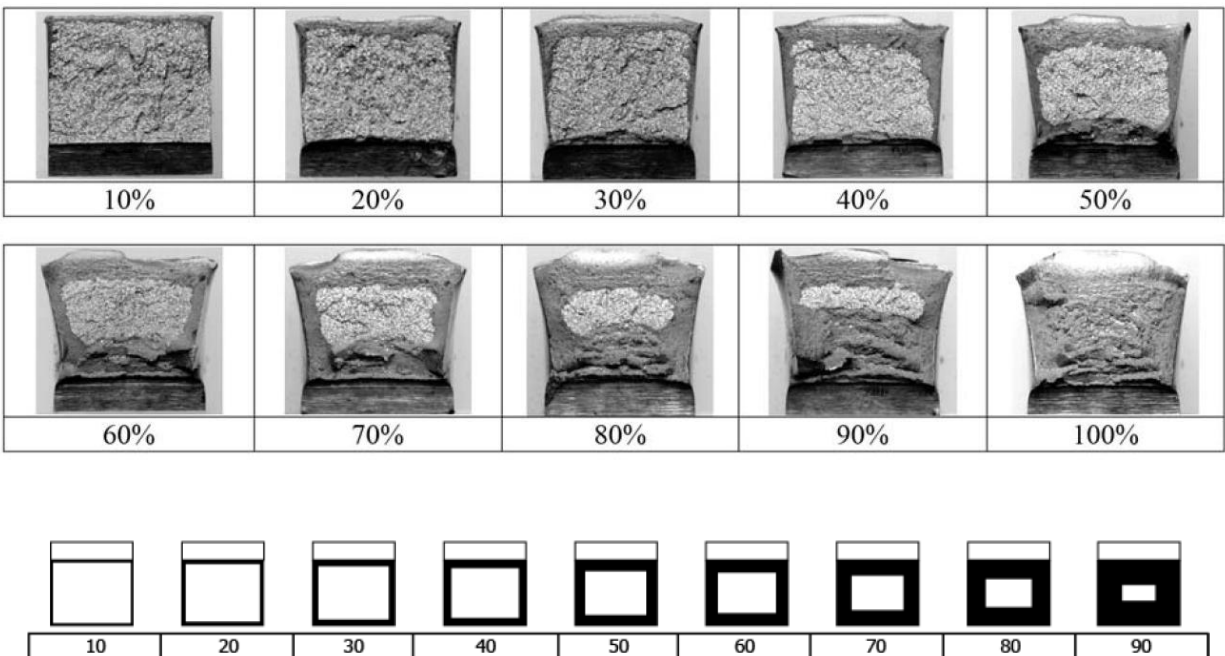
Images from ASTM Fracture Appearance chart and Shear Fracture Appearance Estimation guide [51]
